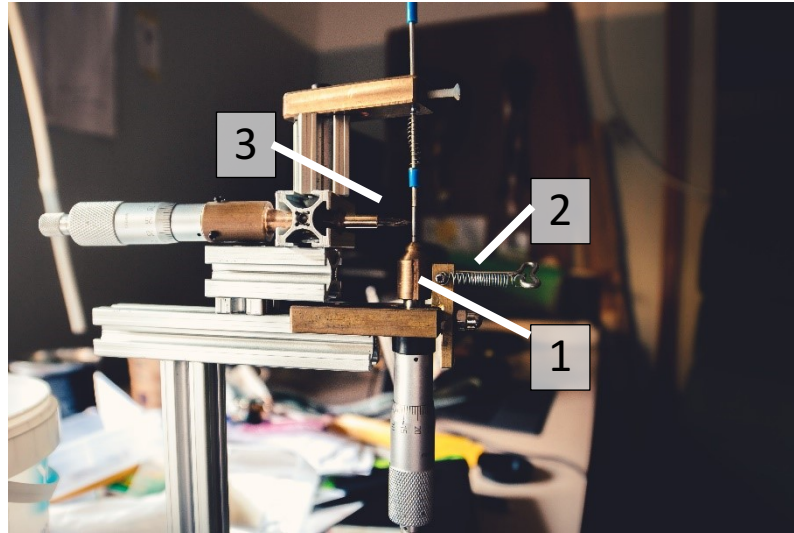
Homemade tool for dividing the piezoelectric tube in five sectors. (1) indicates the brass cap on which the tube is mounted; (2) indicates the system with stick and spring to allow 90° rotation of the tube; (3) sharp Widia tip for piezoelectric tube scratching.
